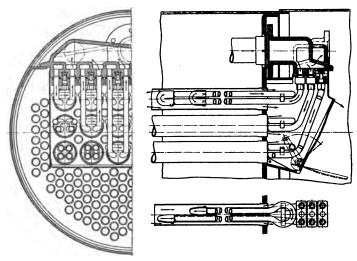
Schmidt's smoke-tube superheater (locomotive type).
